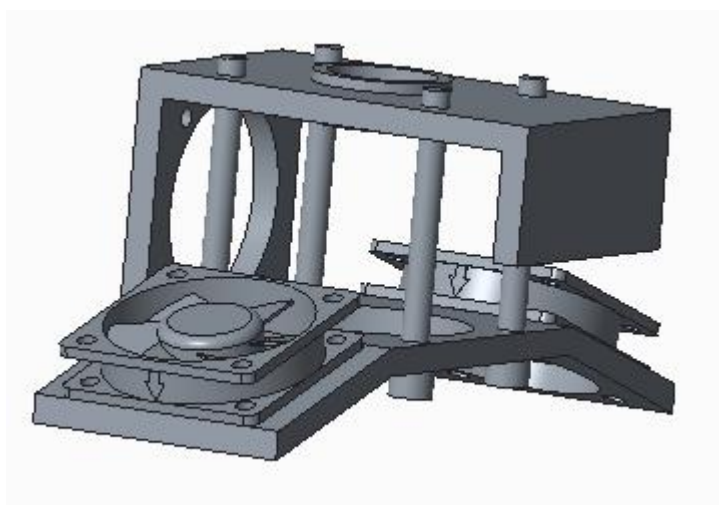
Assembly of the layer fans support with the four bolts and the extruder support
